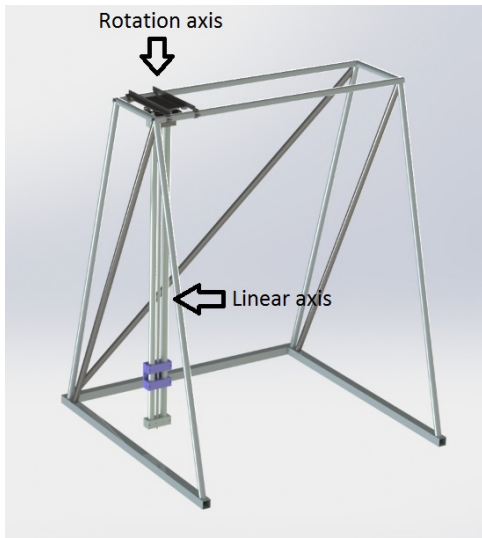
A CAD model of the linear axis and rotational axis assembly. A support frame was made to be able to suspend the assembly from the "ceiling".
